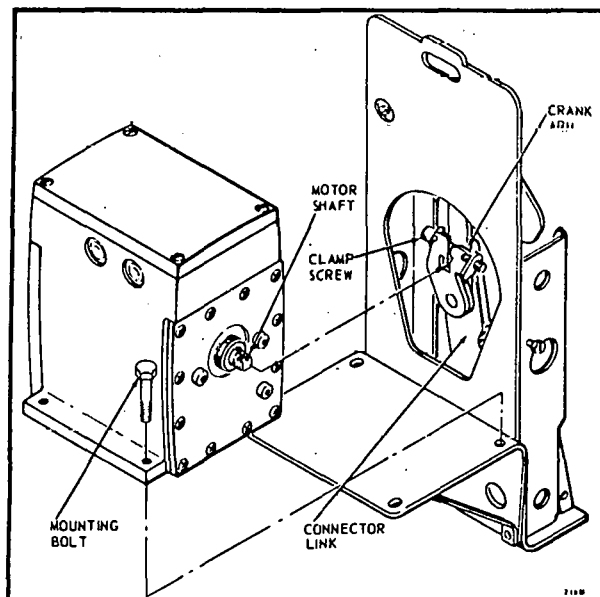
MOUNTING THE MOTOR ON Q601 VALVE LINKAGE.
